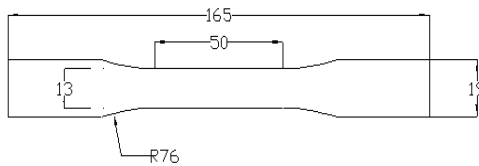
Dimensional detail of casted specimen as per ASTM 638-90
